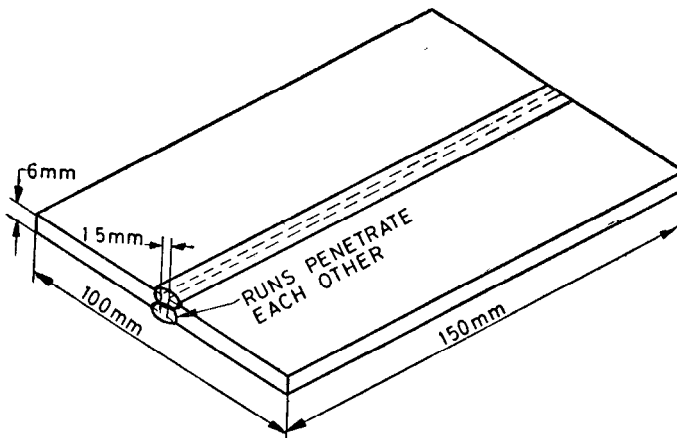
BUTT WELD (SQUARE EDGE)
